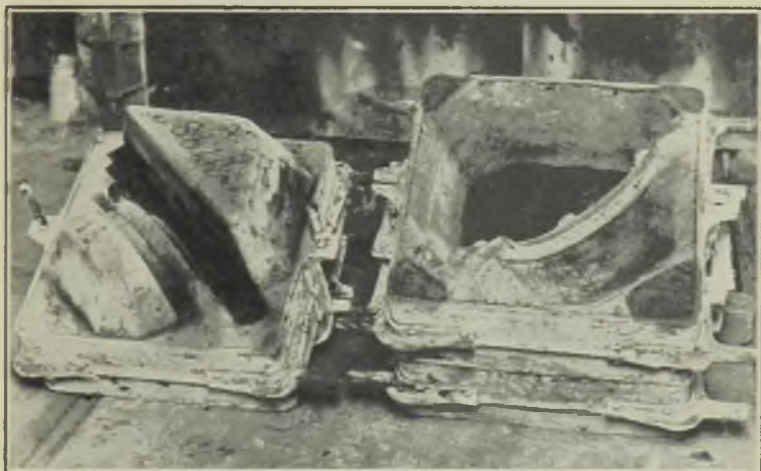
COPE AND DRAG HALF MOULDS FOR NOZZLE SEGMENTS.
